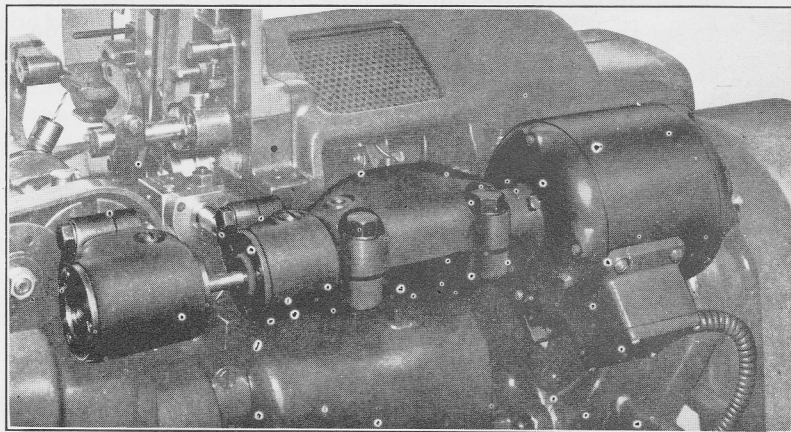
Motor Drive for Cross Drilling and Turret Drilling Attachments
